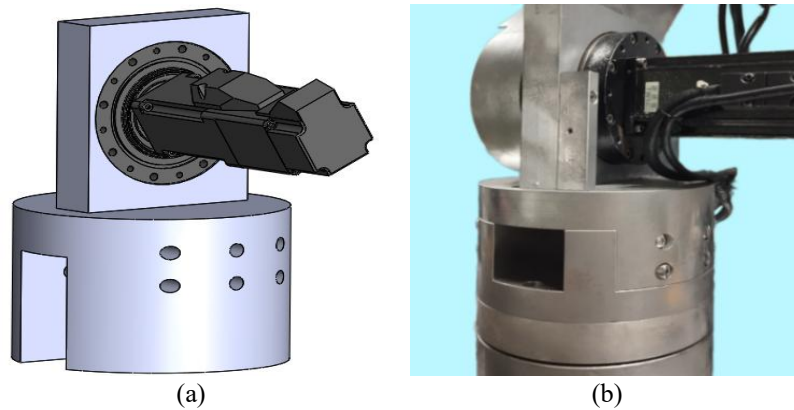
Mechanical design of Joint 2, (a) CAD design of Joint 2, and (b) The prototype of Joint 2
